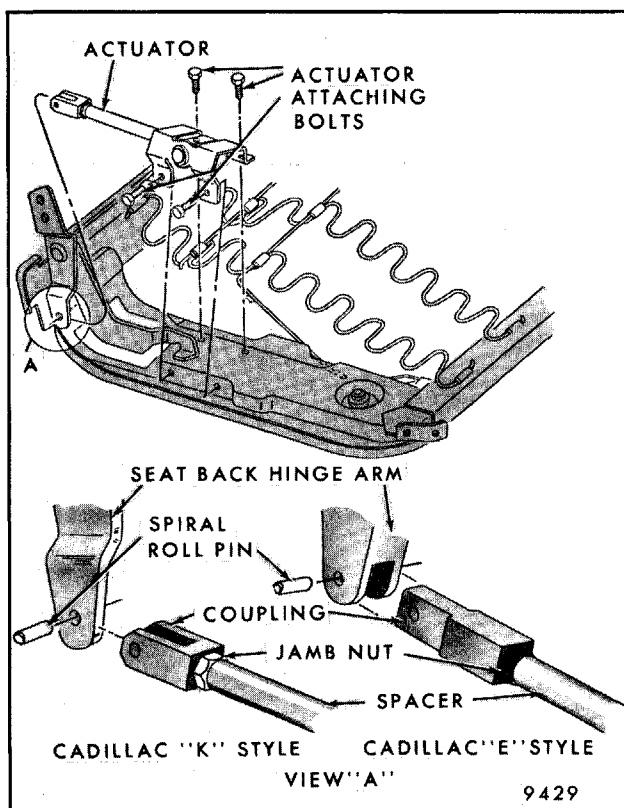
Front Seat Back Power Reclining Actuator - Cadillac Eldorado and Seville
